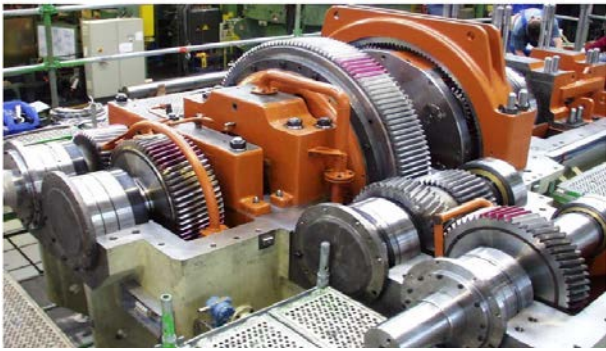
Extruder Gearbox Input Shaft and Planetary Section
